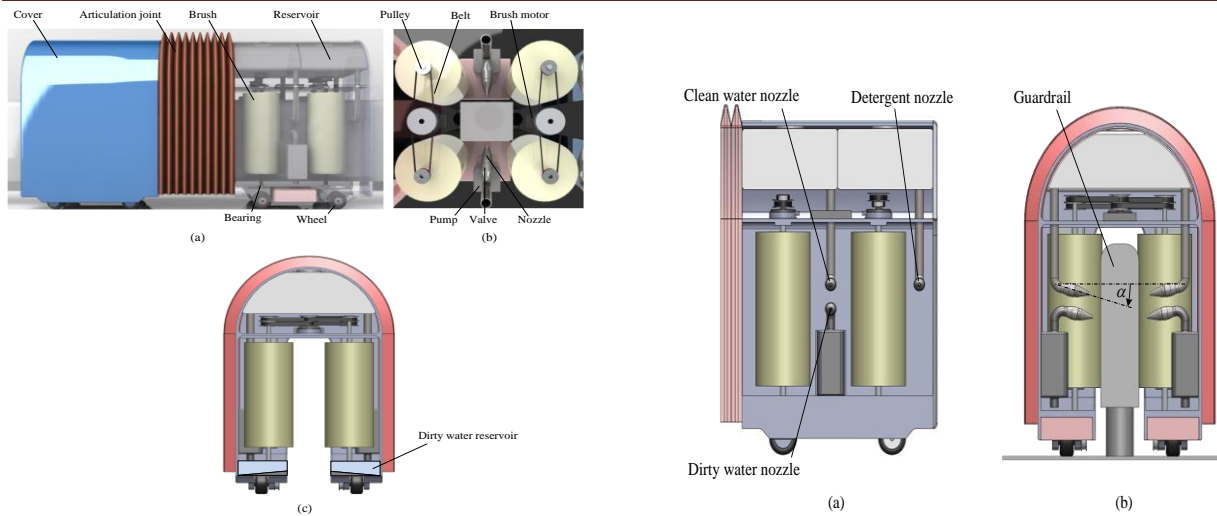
Washing Chamber (a) side view (b) top view (c) front view Fig. 5. Nozzles (a) position of nozzles (b) angle of nozzles.
